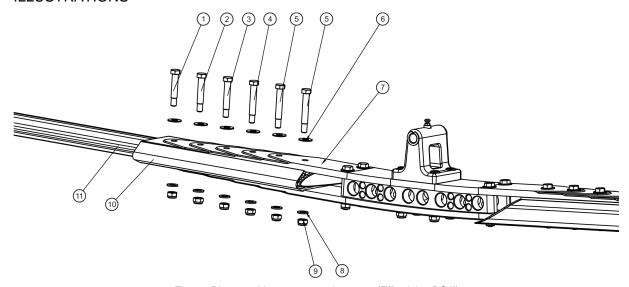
Disassembly rotor - teetering parts (Effectivity: RS II)
